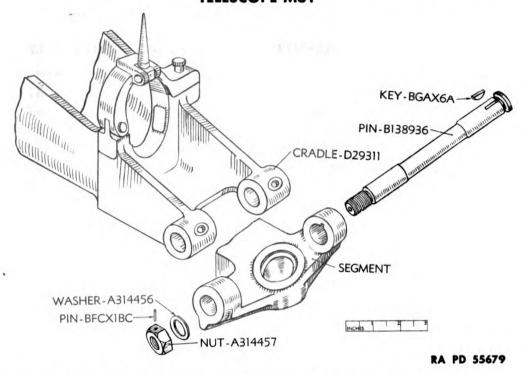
Cradle and Gear Segment Assembly at Front End Exploded View
